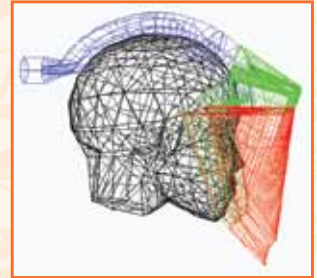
CAD Modelization of Welding Helmet with new Ventilation System
